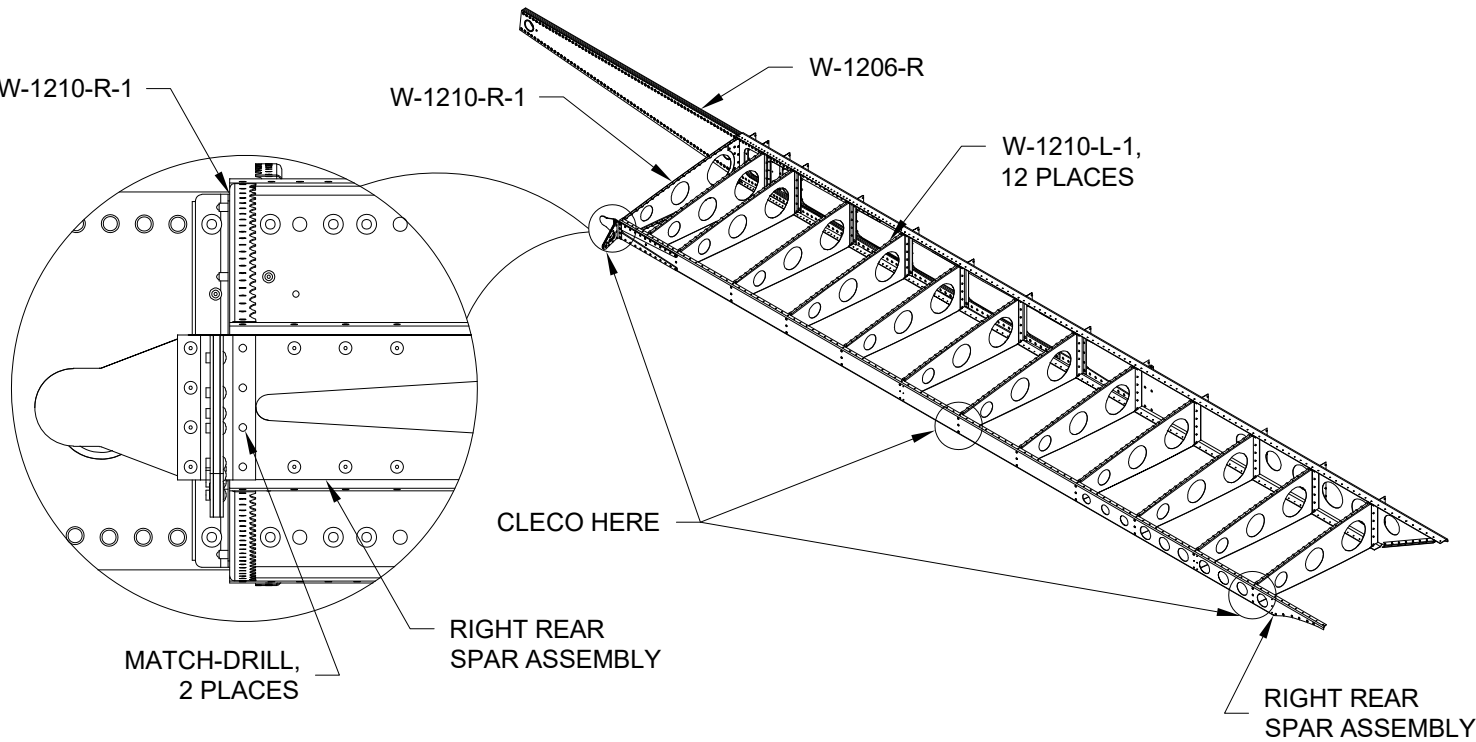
MATCH-DRILLING MAIN RIB AFT FLANGE
